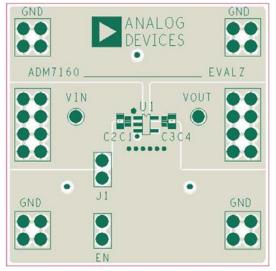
ADM7160UJ-EVALZ (5-Lead TSOT) Printed Circuit Board (PCB) Layout 2555-001
